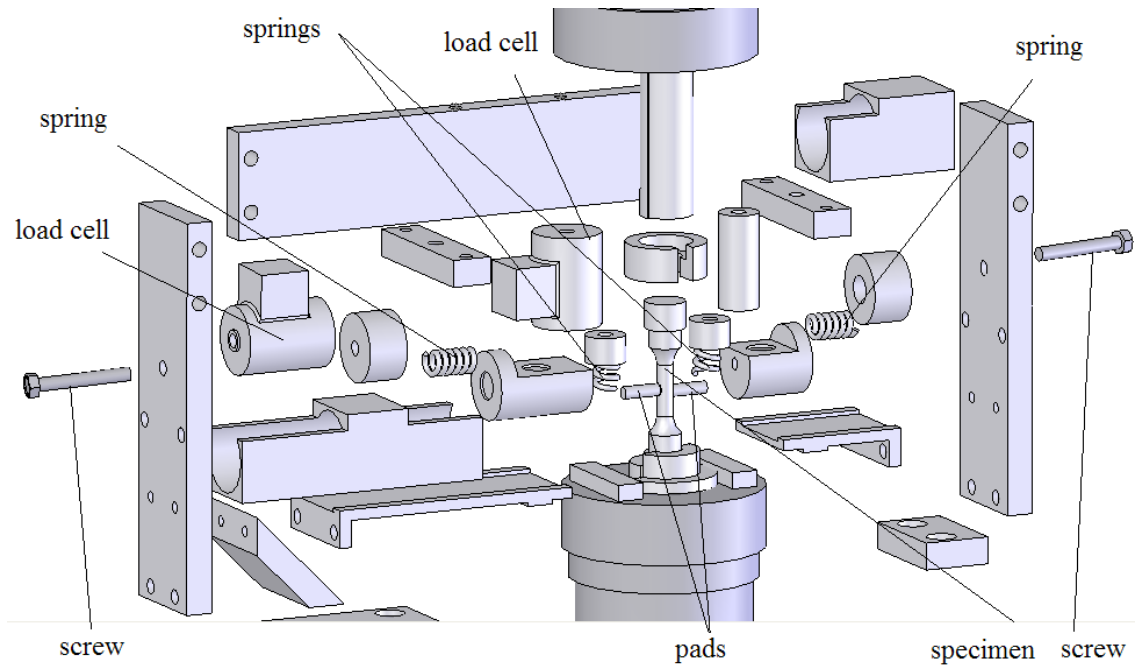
Exploded view of the equipment described in this work [167,168]
